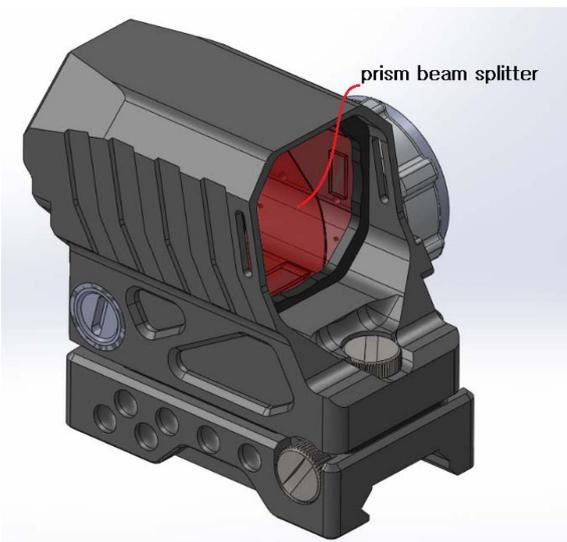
3D drawing of new dot sight with prism beam splitter.
